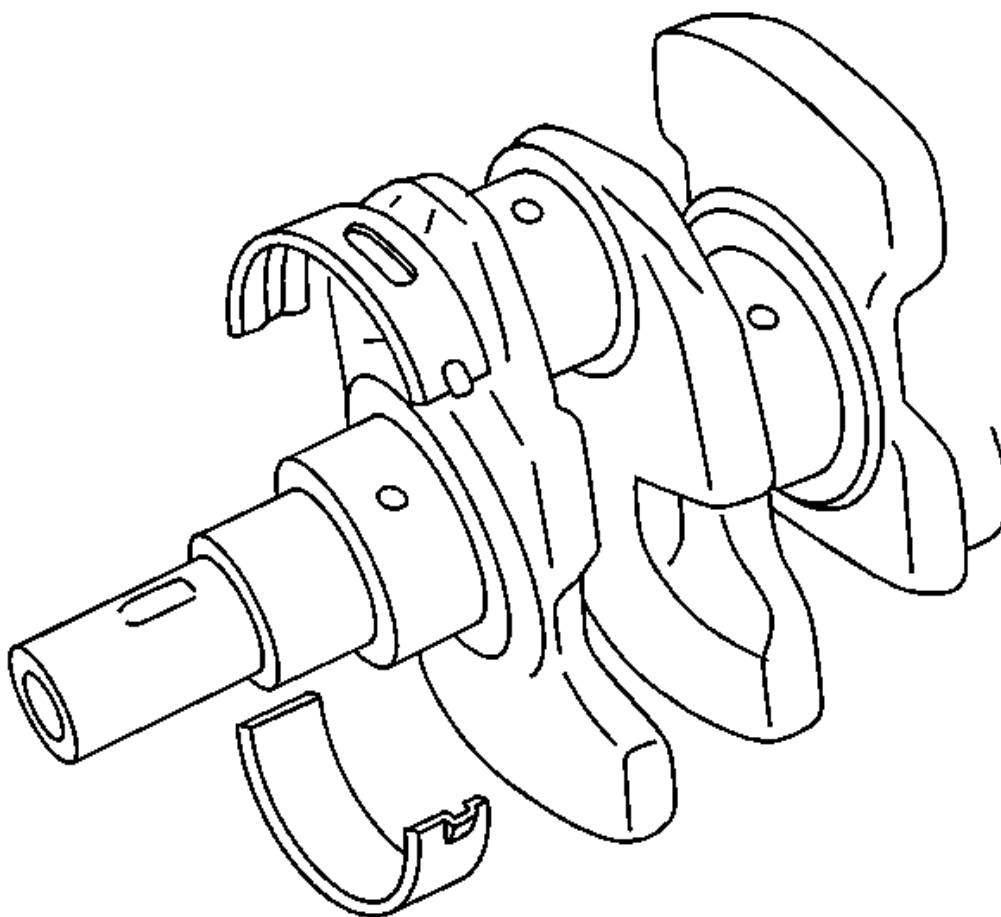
Cleaning Oil, Sludge & Carbon From Crankshaft
